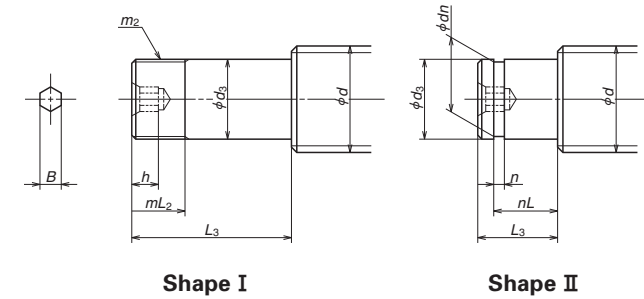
Standard shaft end configuration (opposite to the drive side)
